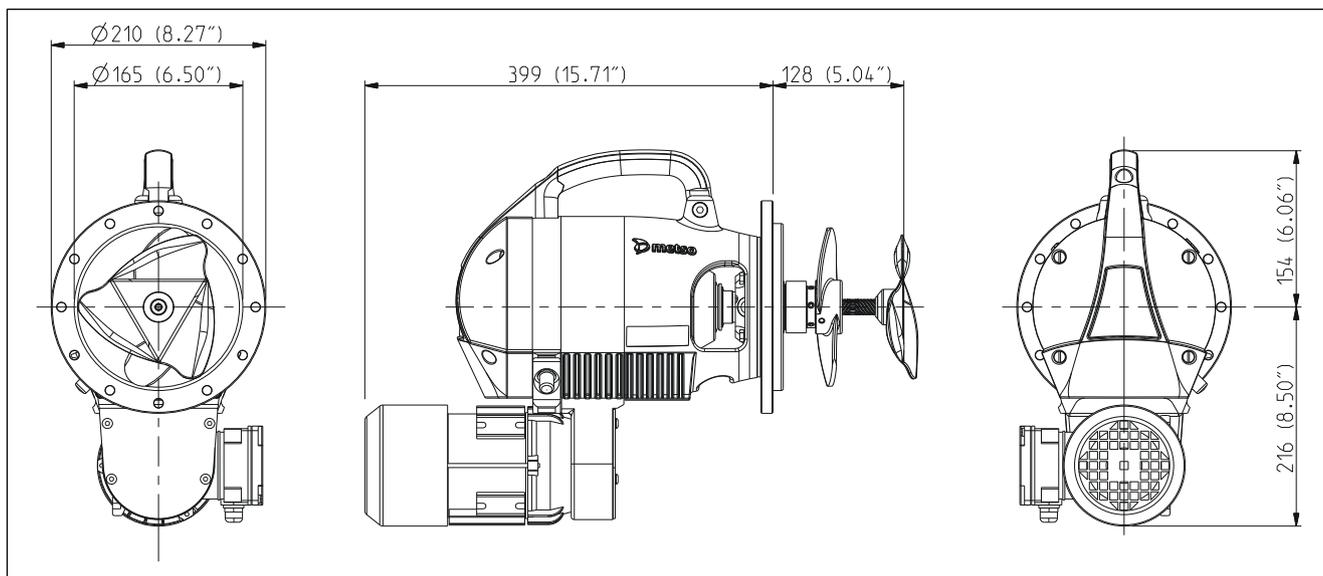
The dimensions of the transmitter with TH sensing element and small flange, BD model.
